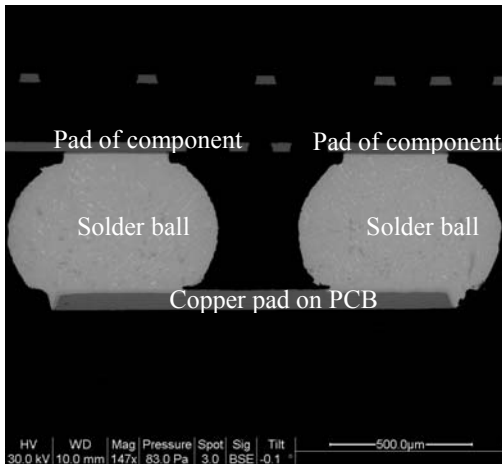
Backscattered electron images of two solder balls connected on Cu pads (mixed assemblies, one replacement)
